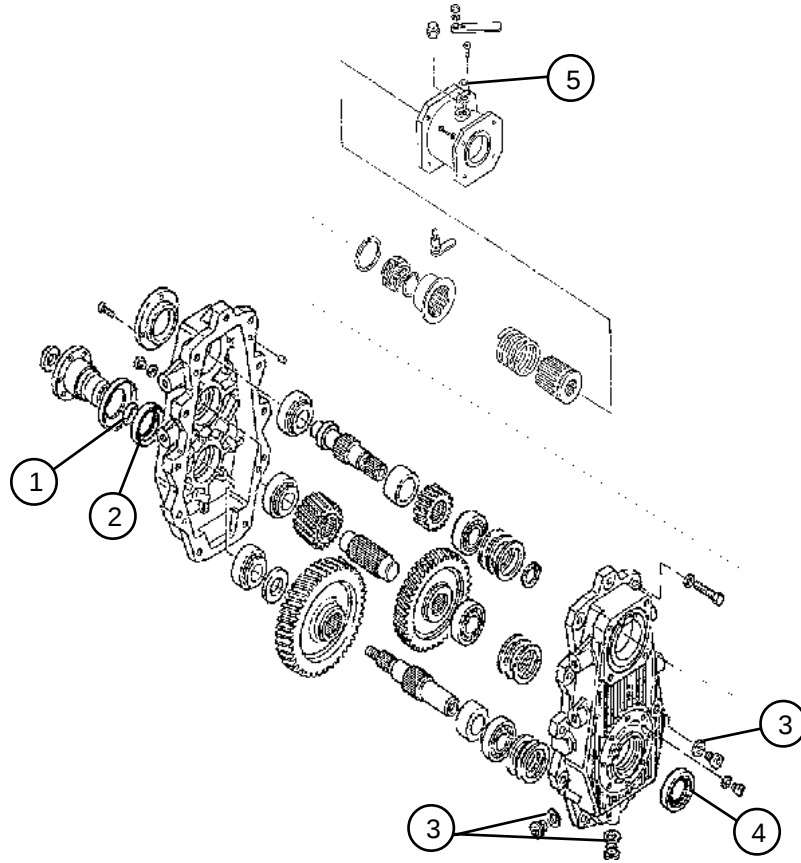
DRIVE AXLE ASSEMBLY (Optional 4x4)
